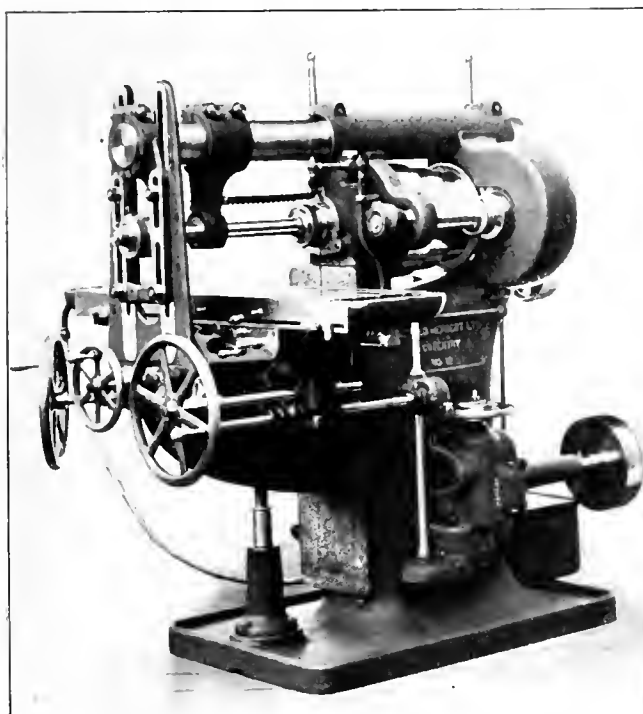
Horizontal Plain Milling Machine, built by Alfred Herbert, Ltd.
